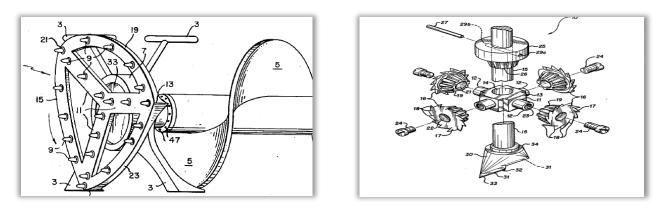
Reuleaux type drill cutter [5] Figure 5. Disassembled type drill cutter [6]
